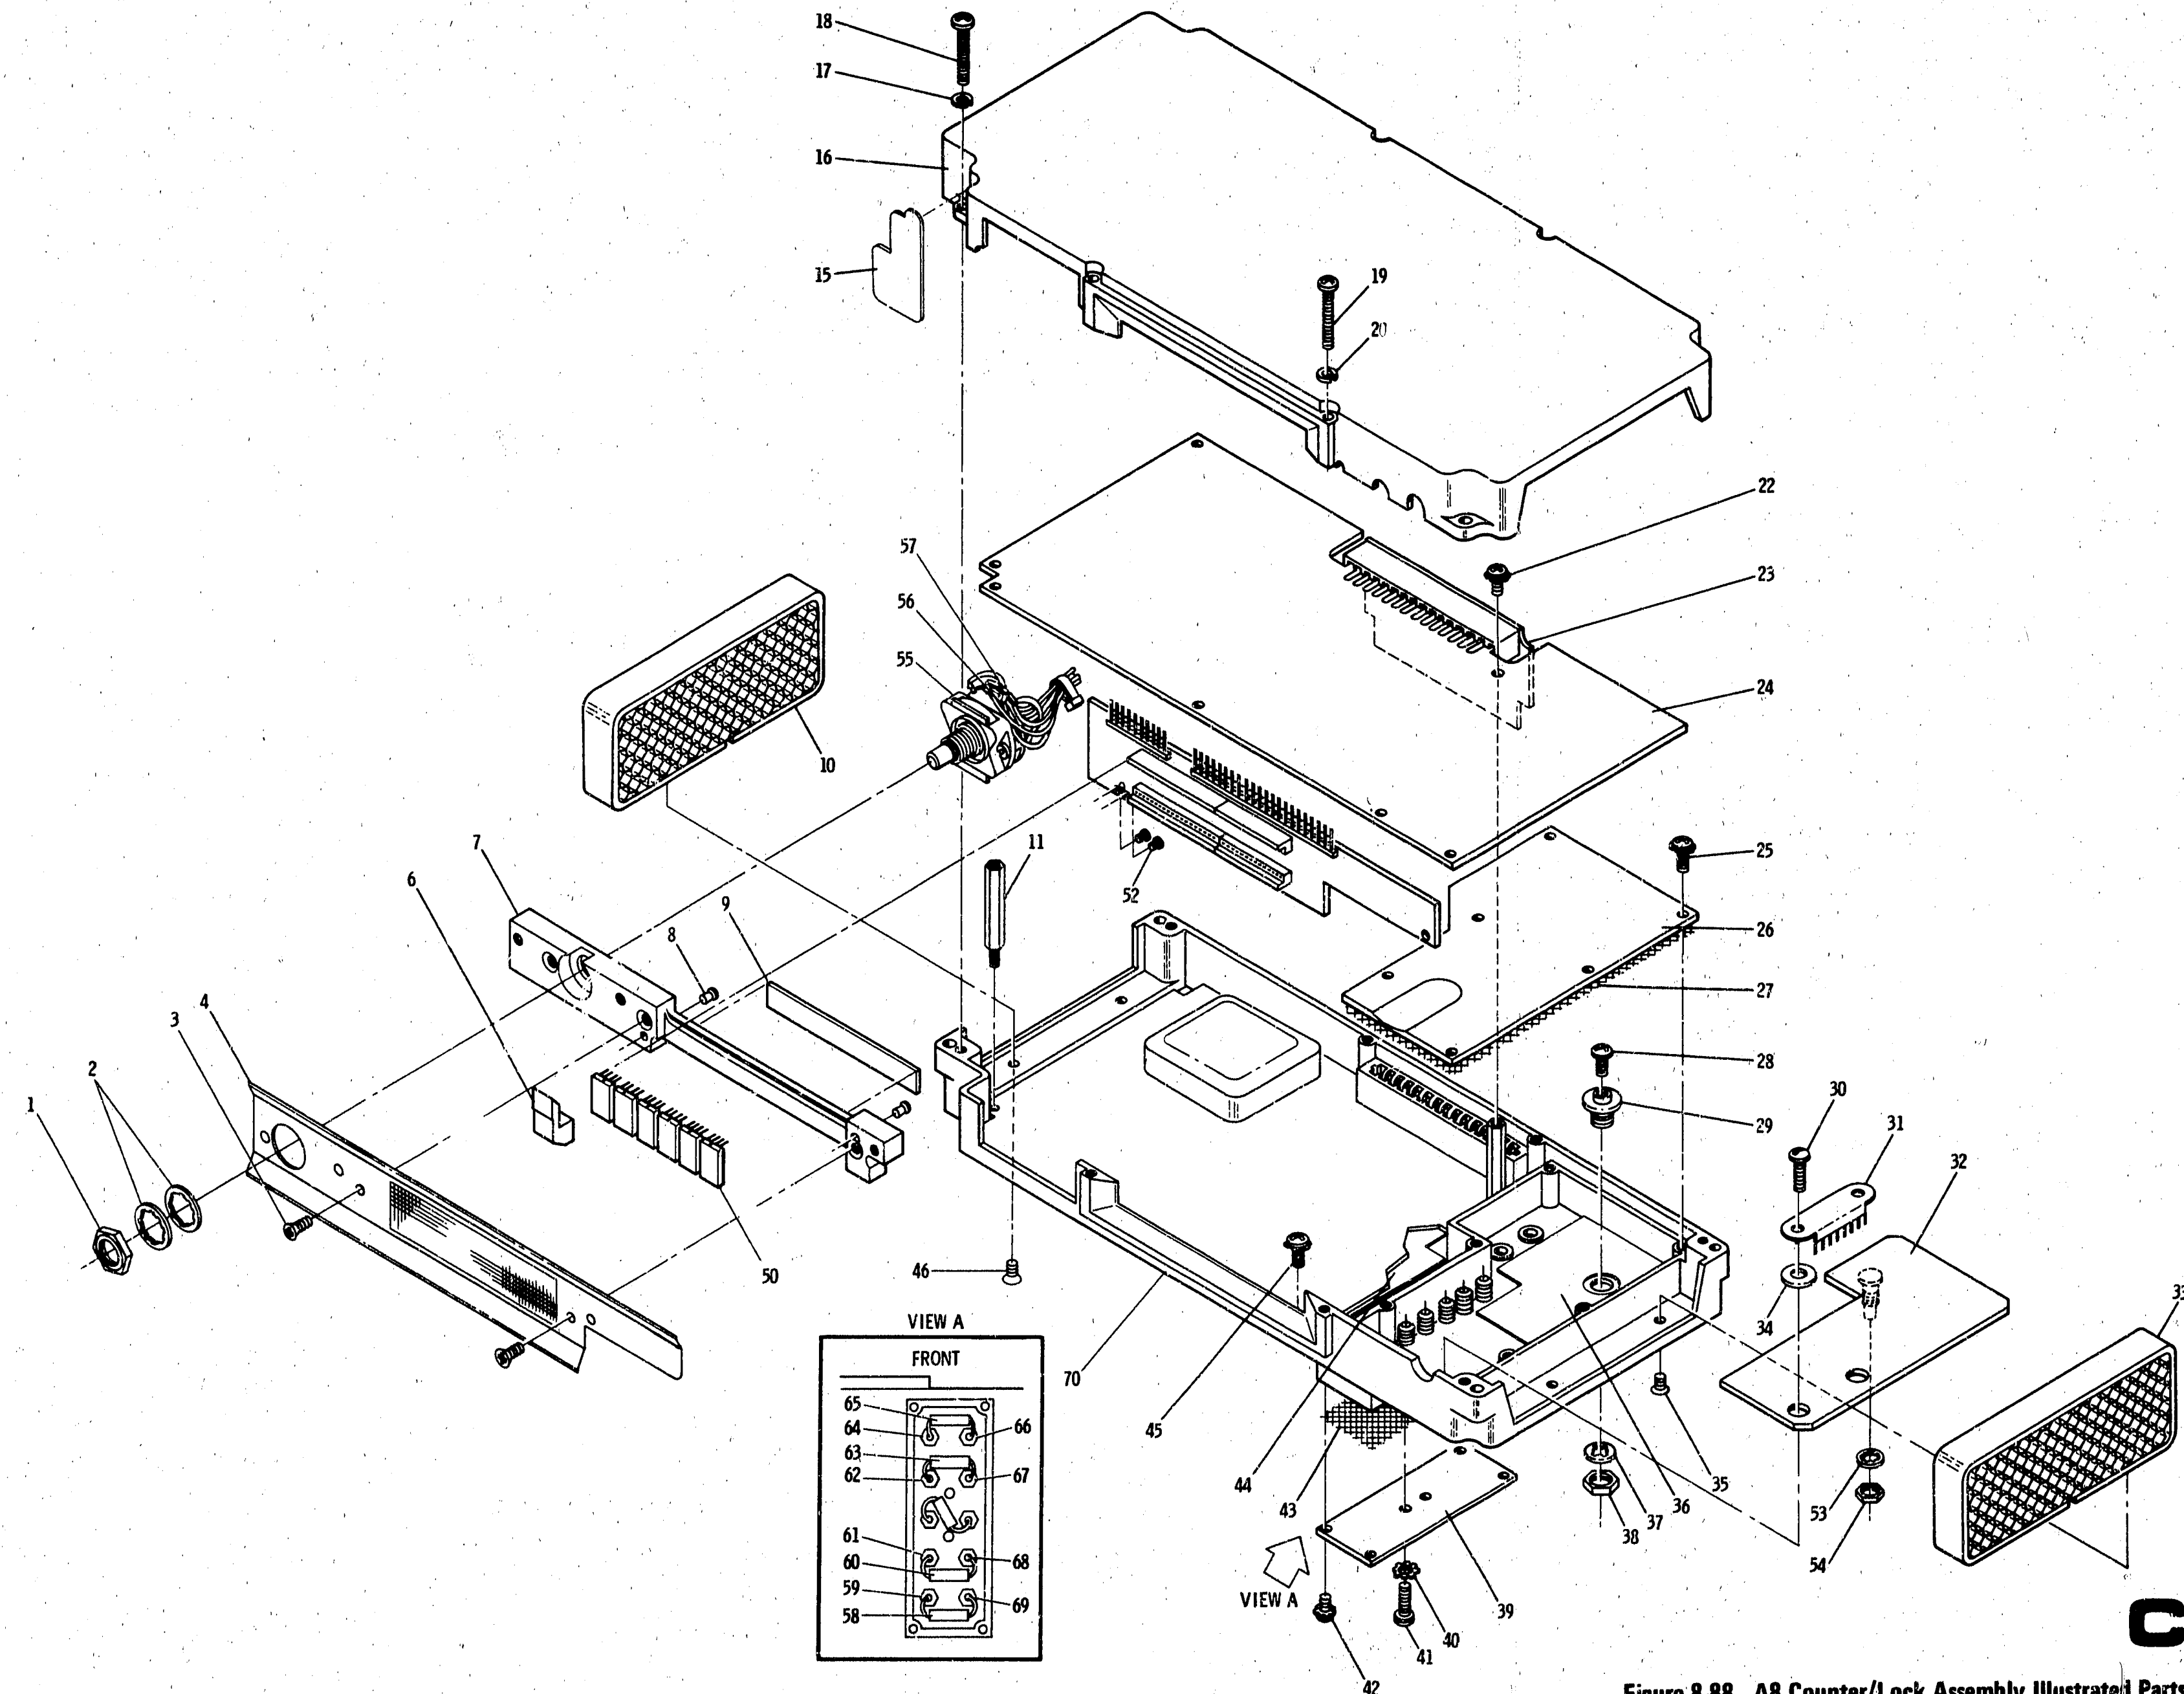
A8 Counter/Lock Assembly Illustrated Parts Breakdown
